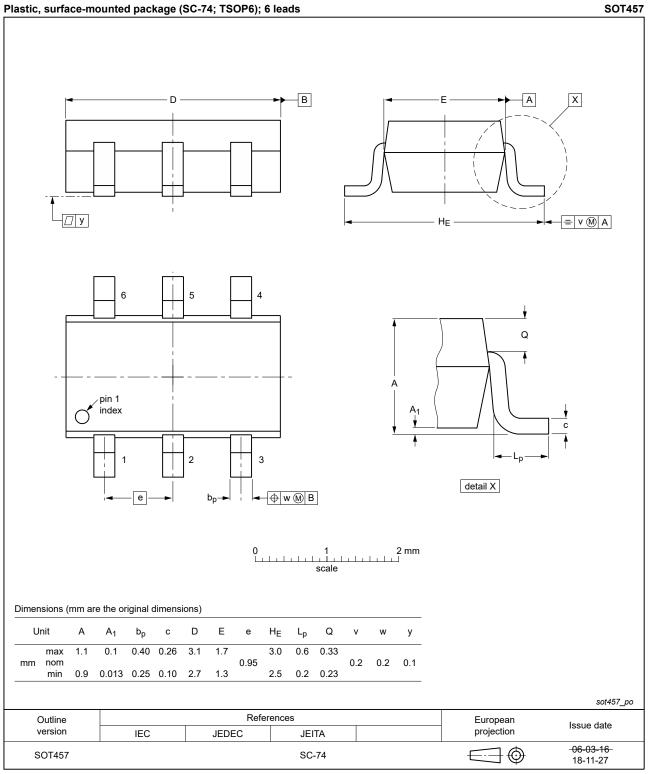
Package outline SOT457 (SC-74; TSOP6)
